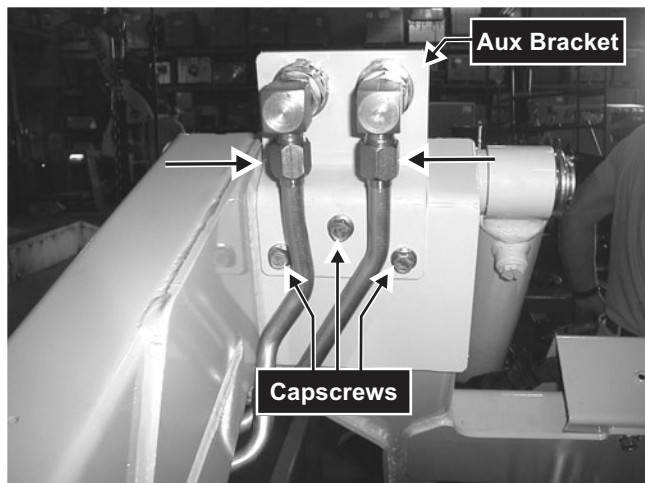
Location of auxiliary hydraulic tubes connected at back of auxiliary coupler bracket to 90° elbows.
